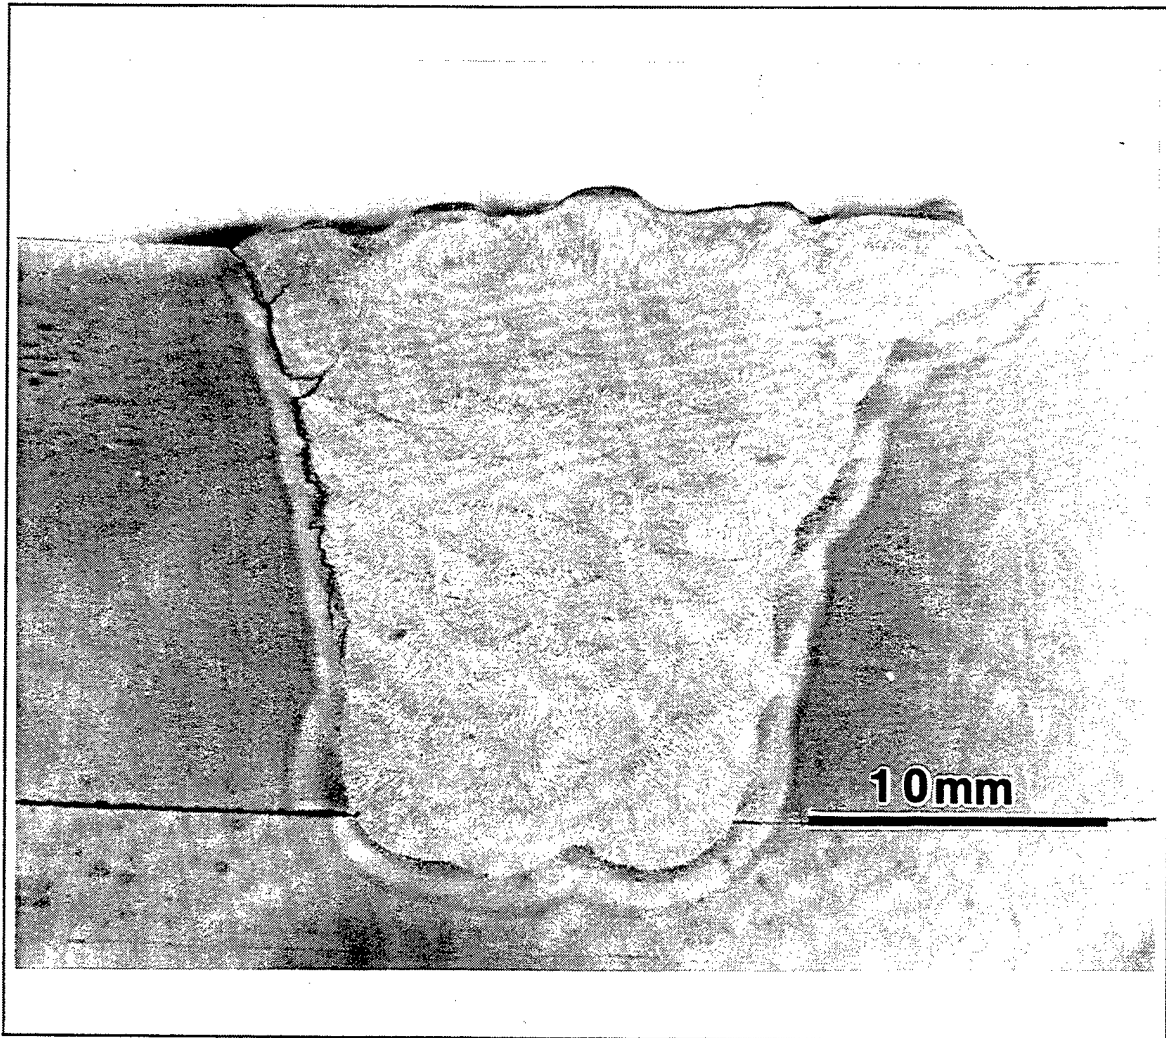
Macro photograph of UWW03 weld sample. Welded at a depth of 6.7m in seawater and at a temperature of 2.8°C.
